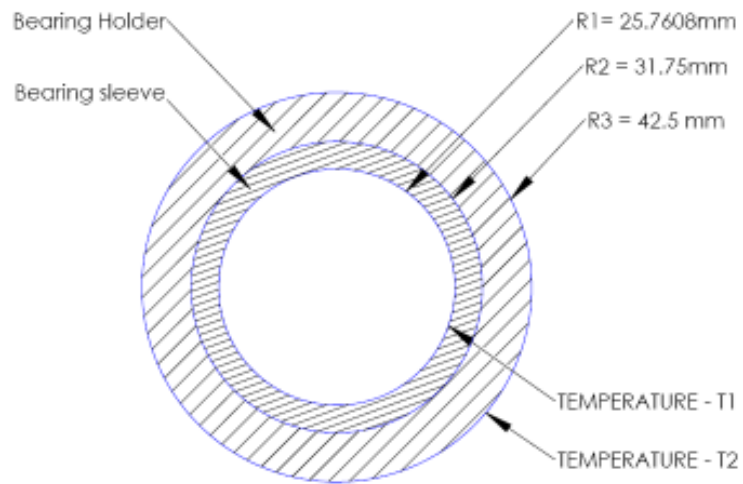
Schematic drawing of bearing sleeve and bearing holder
